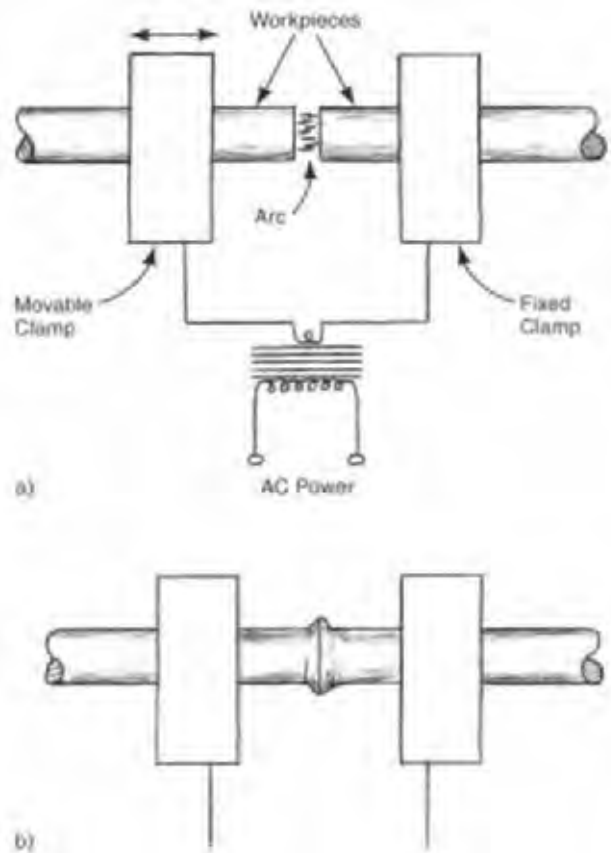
C10 Flash welding (FW) to join two pieces of metal rod: a) The workpieces have been moved together to touch and drawn slightly apart to create an arc which melts the metal at the ends. b) The workpieces have been pressed together; the heated metal at the joint has cooled and a finished weld results.
